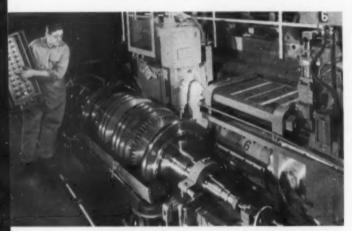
Third machine for milling slots is equipped with a broaching head having a six-station turret.
